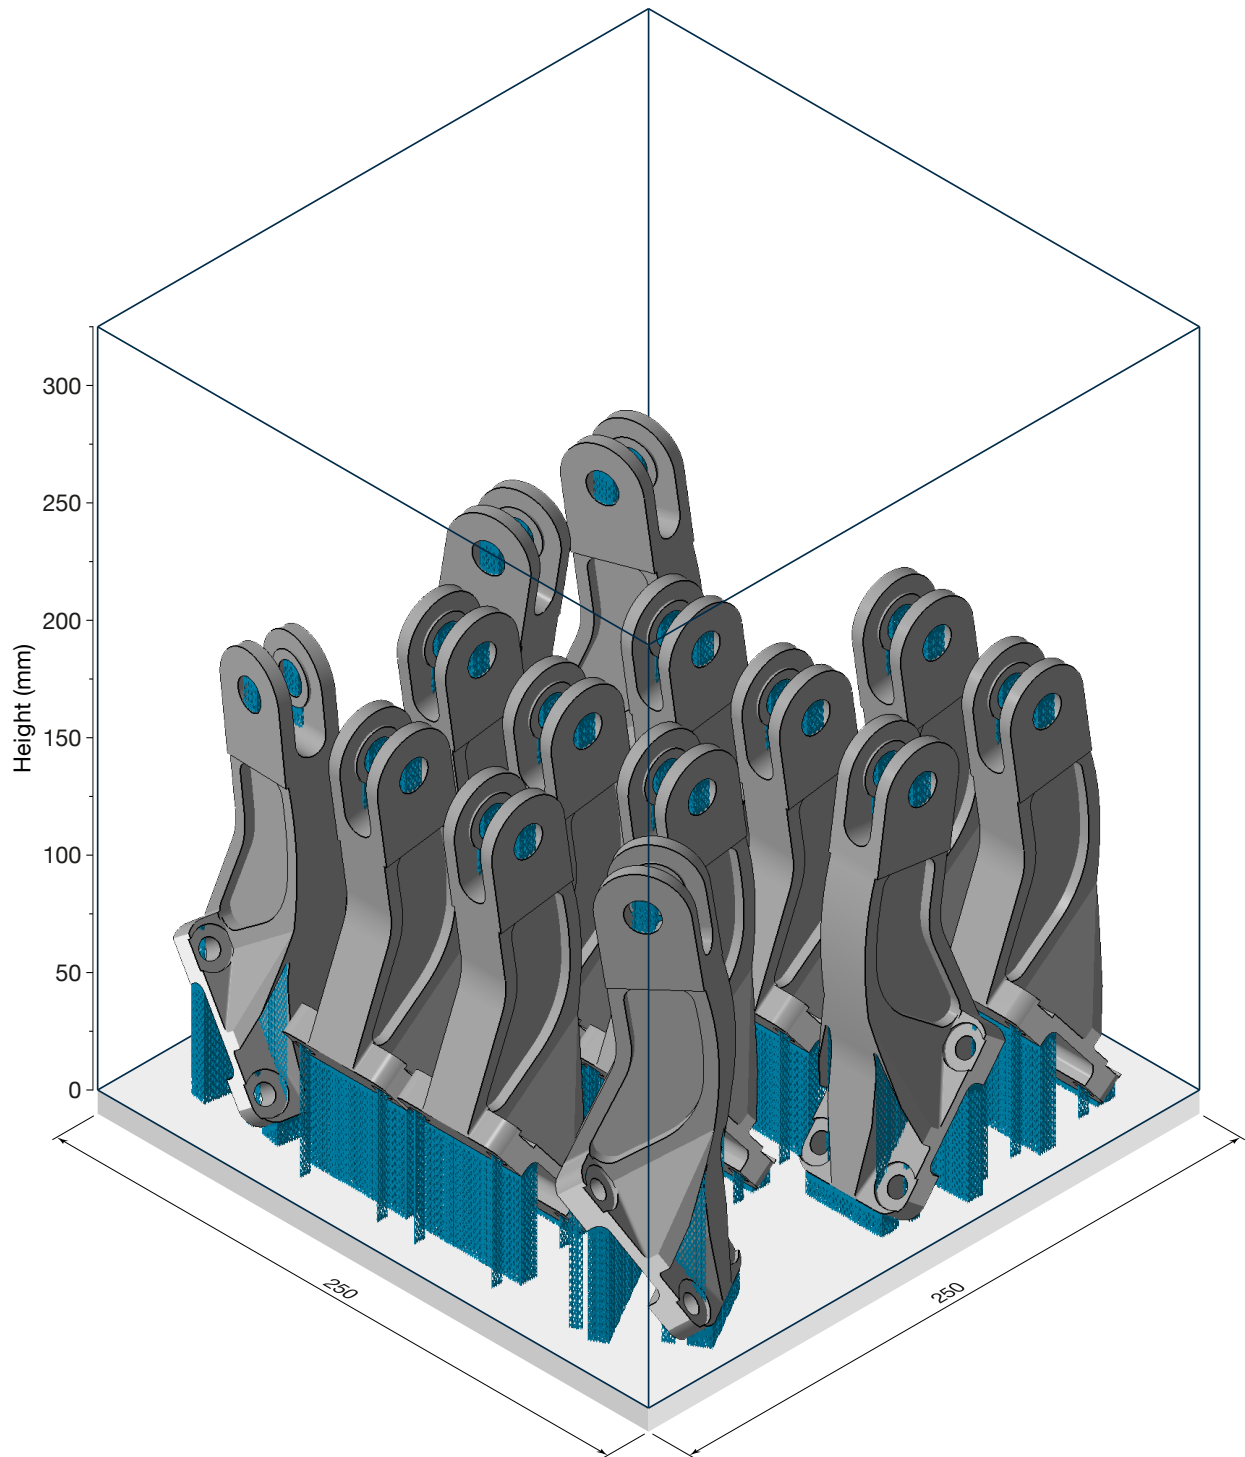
Proposed brackets orientations on the EOS M 290 building platform.
